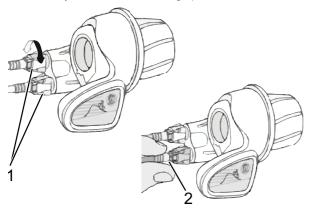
Twist grip with adjusting sleeves (1) and play in the gear shift (2)
